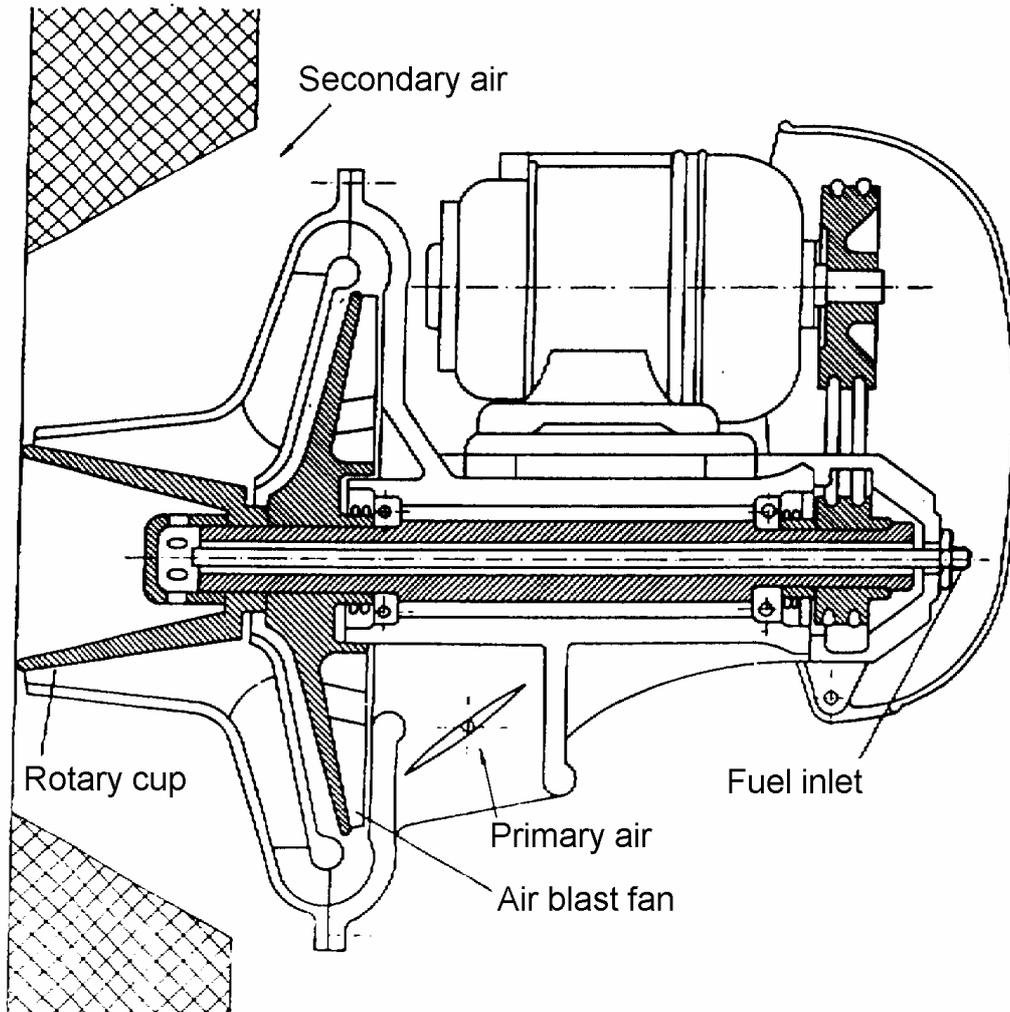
Industrial burner equipped with rotary cup atomizer.
